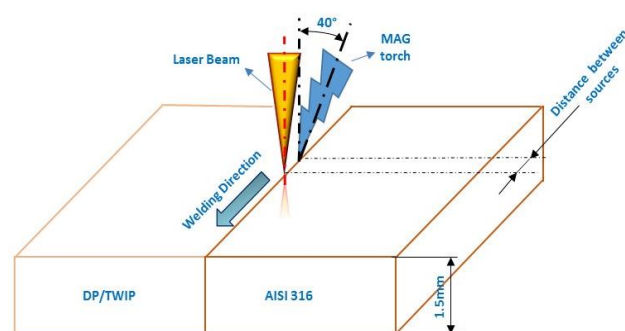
Schematic configuration of laser-MAG hybrid welding.
